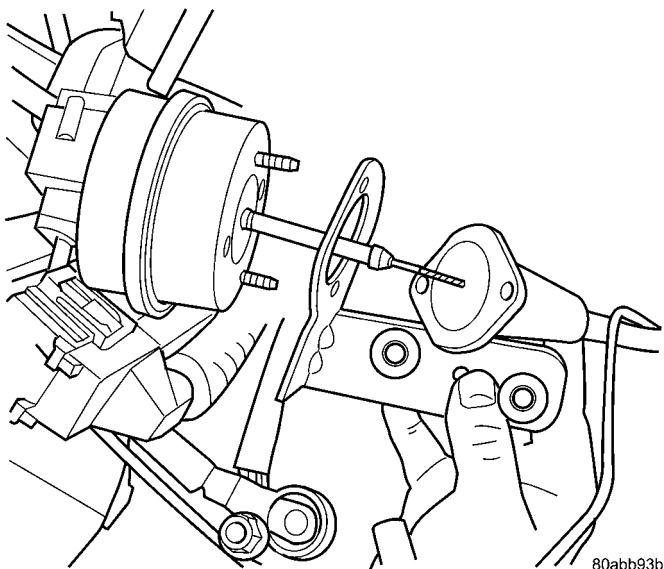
SPEED CONTROL CABLE AND BRACKET
